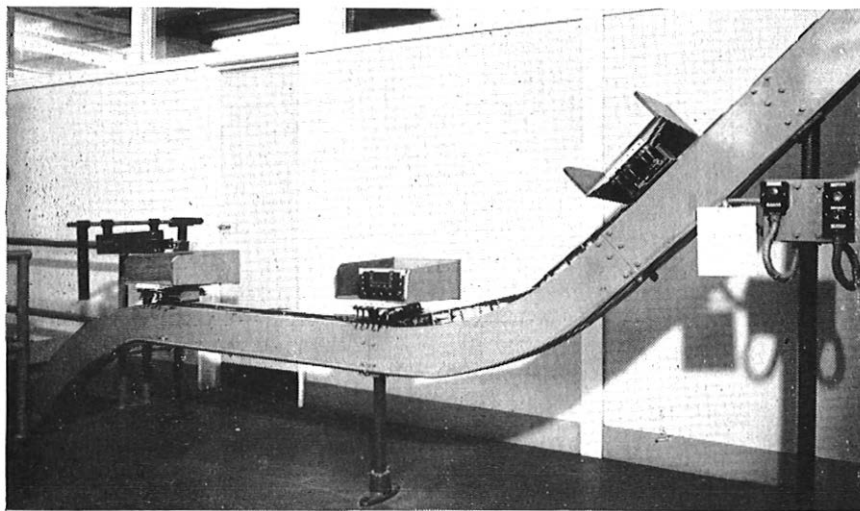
TYPICAL SECTION OF CONVEYOR WITH LOADING GAUGE
